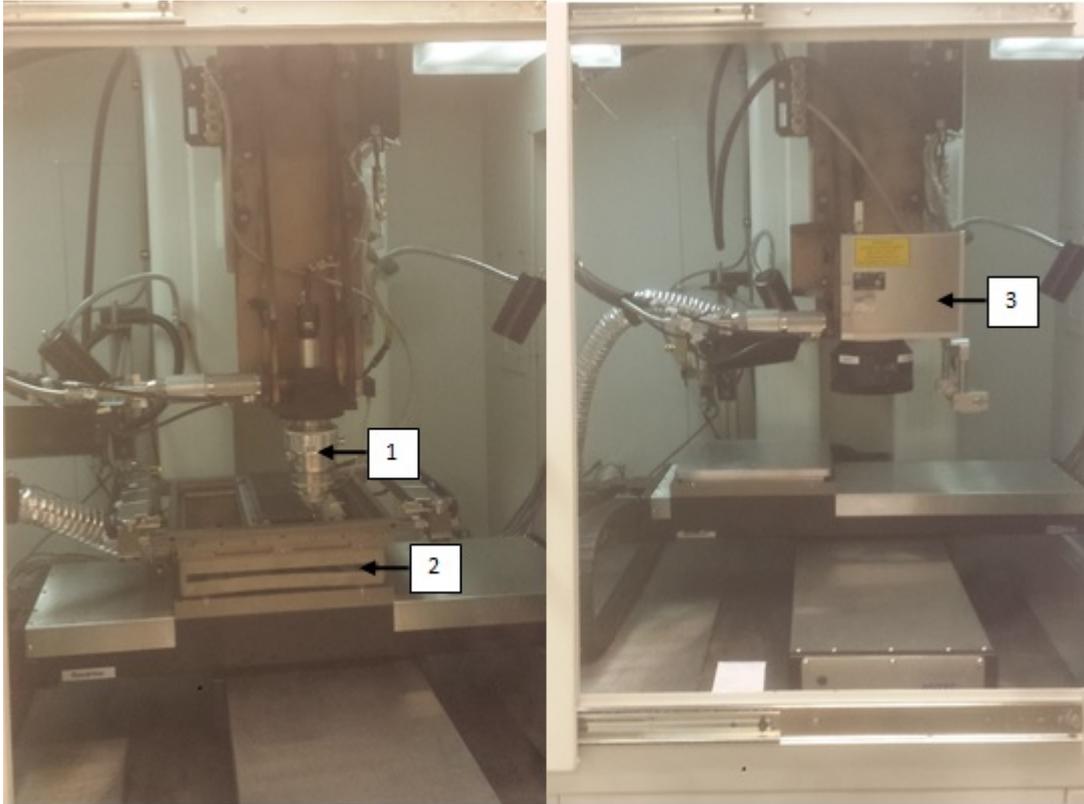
Cutting(Left) and Welding(Right) Optics installed on workstation z-axis.
